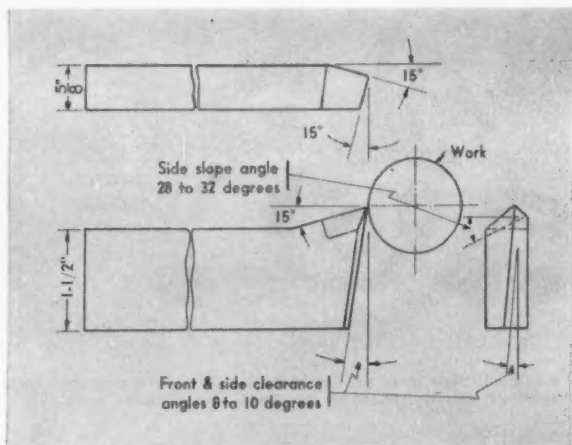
Where a forged tool is employed in machining magnetic ingot iron, the tool angles shown in this drawing are recommended.
